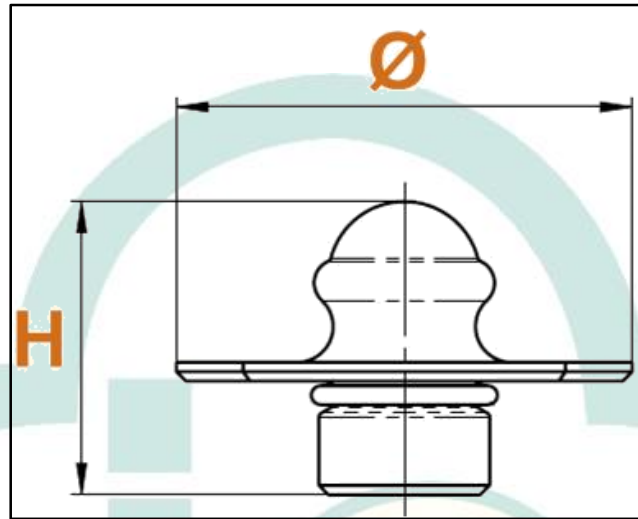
MEDULLARY PLUG - DIMENSIONS
